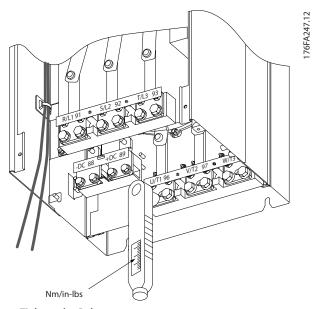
Use a Torque Wrench to Tighten the Bolts
